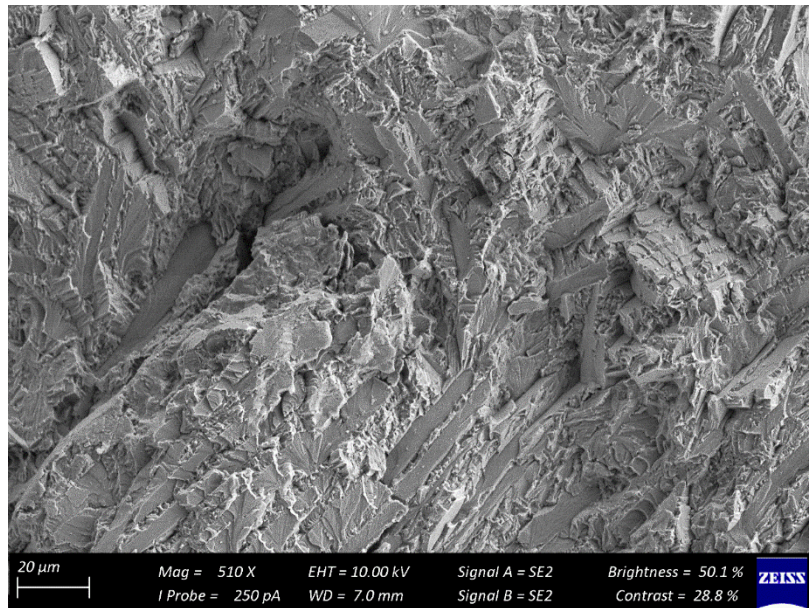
Rough fracture surface of the DA condition containing a combination of smooth facets and rough micro-plastic tearing.
